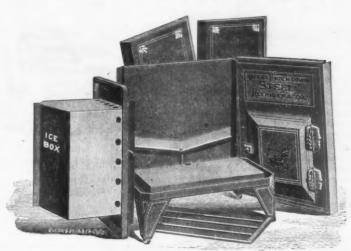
Parts of the Cold-Wave Refrigerator.
